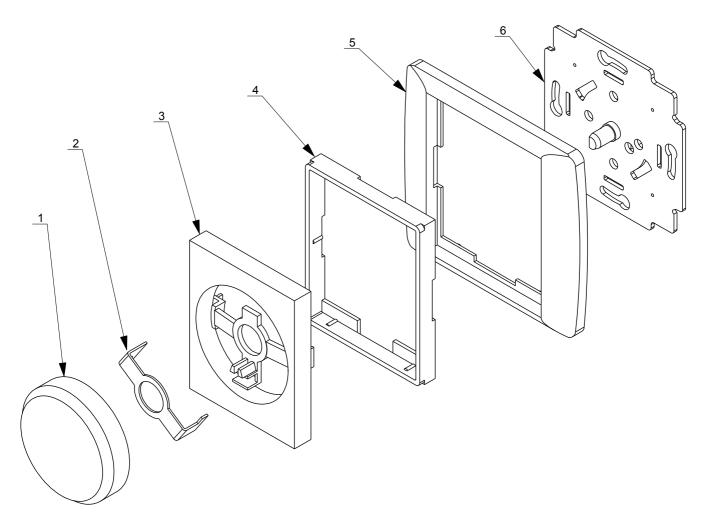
An assembly of the C-RS-0200R rotary control unit in the ABB version (in the figure is the Time design)
